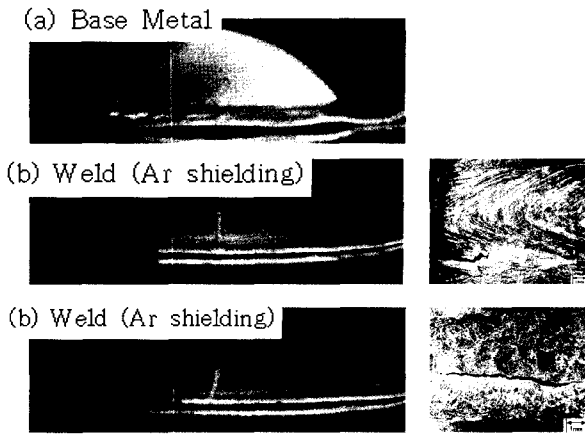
Bulge test coupons and fracture areas of Nd:YAG laser welds in 2mm thick 5052 aluminum alloy.
